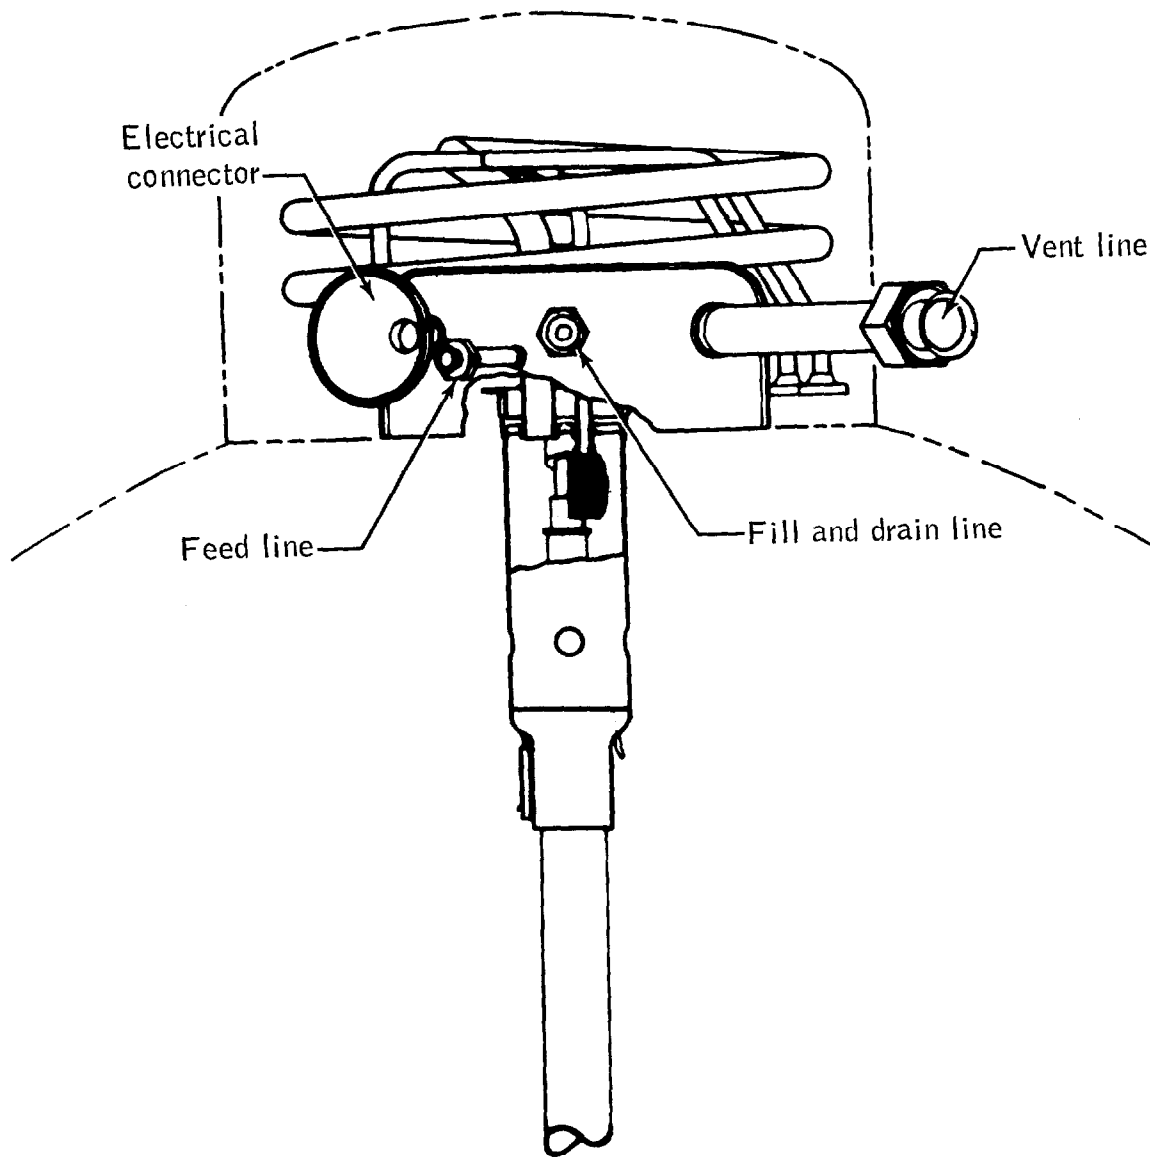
Arrangement of tubing within tank dome assembly.
